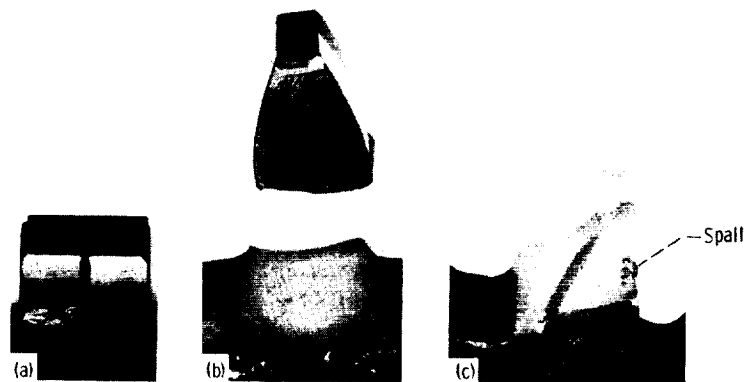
Typical fatigue spall for AISI 9310 gears.
